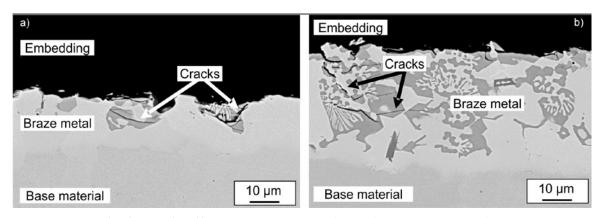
• Cross-sections of the fracture surface of fatigue tested samples brazed in: a) vacuum ($\sigma_a = 37.5$ MPa, N = 5×10^4), b) process gas ($\sigma_a = 37.5$ MPa, N = 1.5×10^4) after corrosive aging (BSD contrast).
